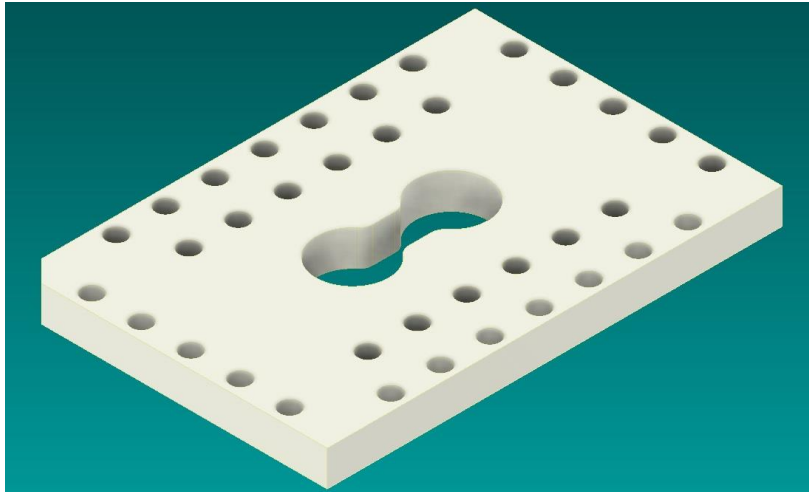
3D CAD drawing of the new gasket.
